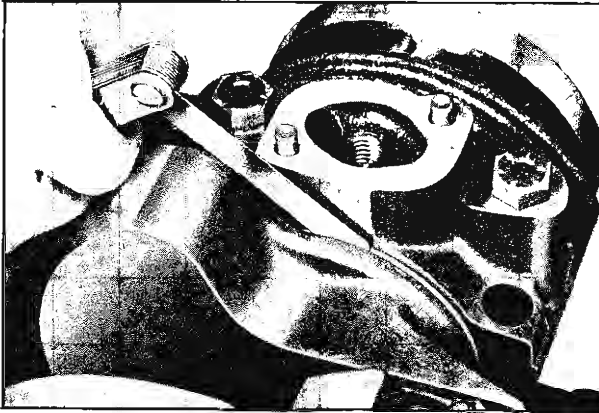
Checking Crankshaft End Play, Using Feeler Gauge
